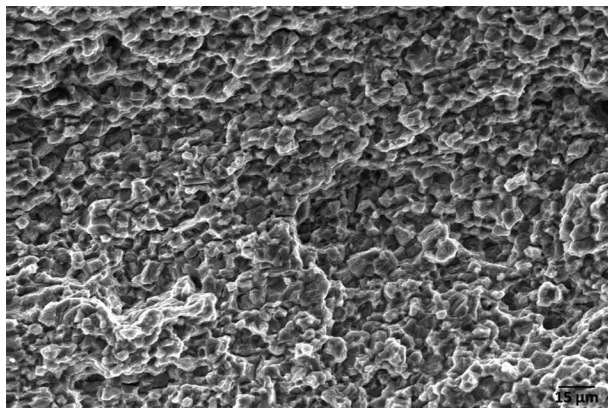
Fracture surface of a room temperature tensile-tested aluminum-lithium alloy AA 2195-T87 friction stir welded sheet. Fine equiaxed dimples are seen throughout
